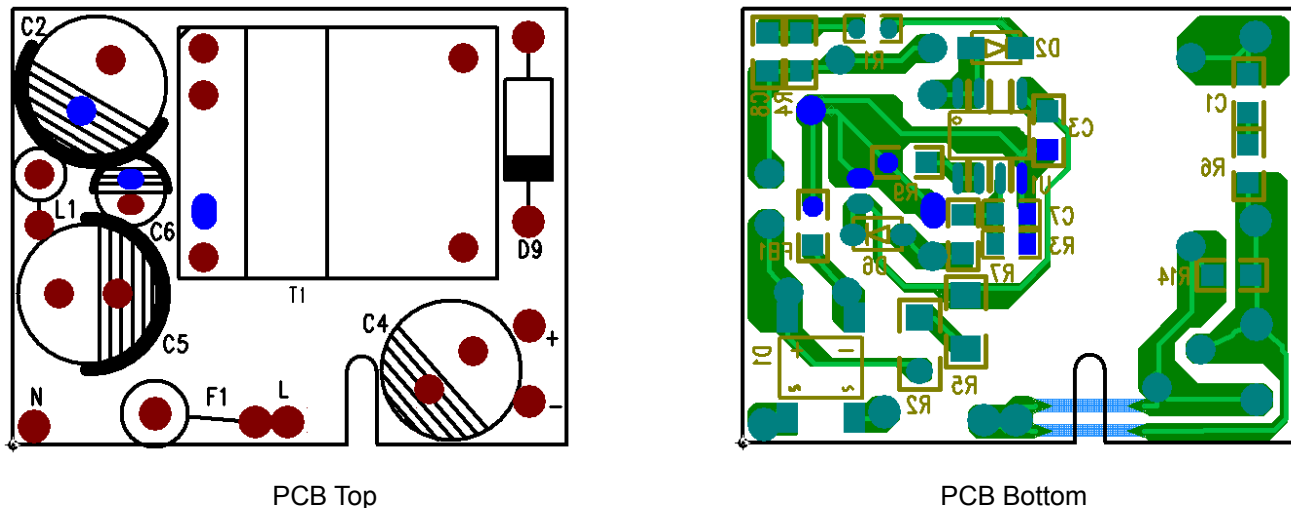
PCB Layout 33.0 mm x 26.0 mm
